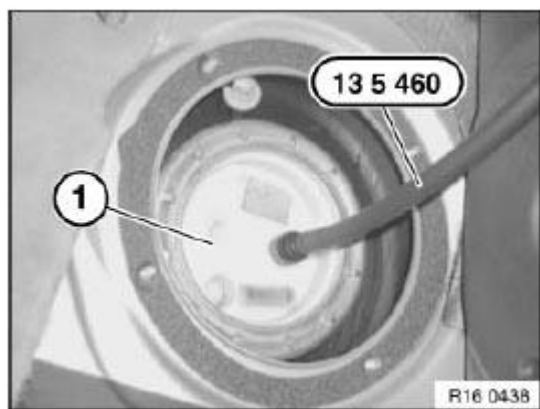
Identifying Fuel Filter With Special Tool 13 5 460
